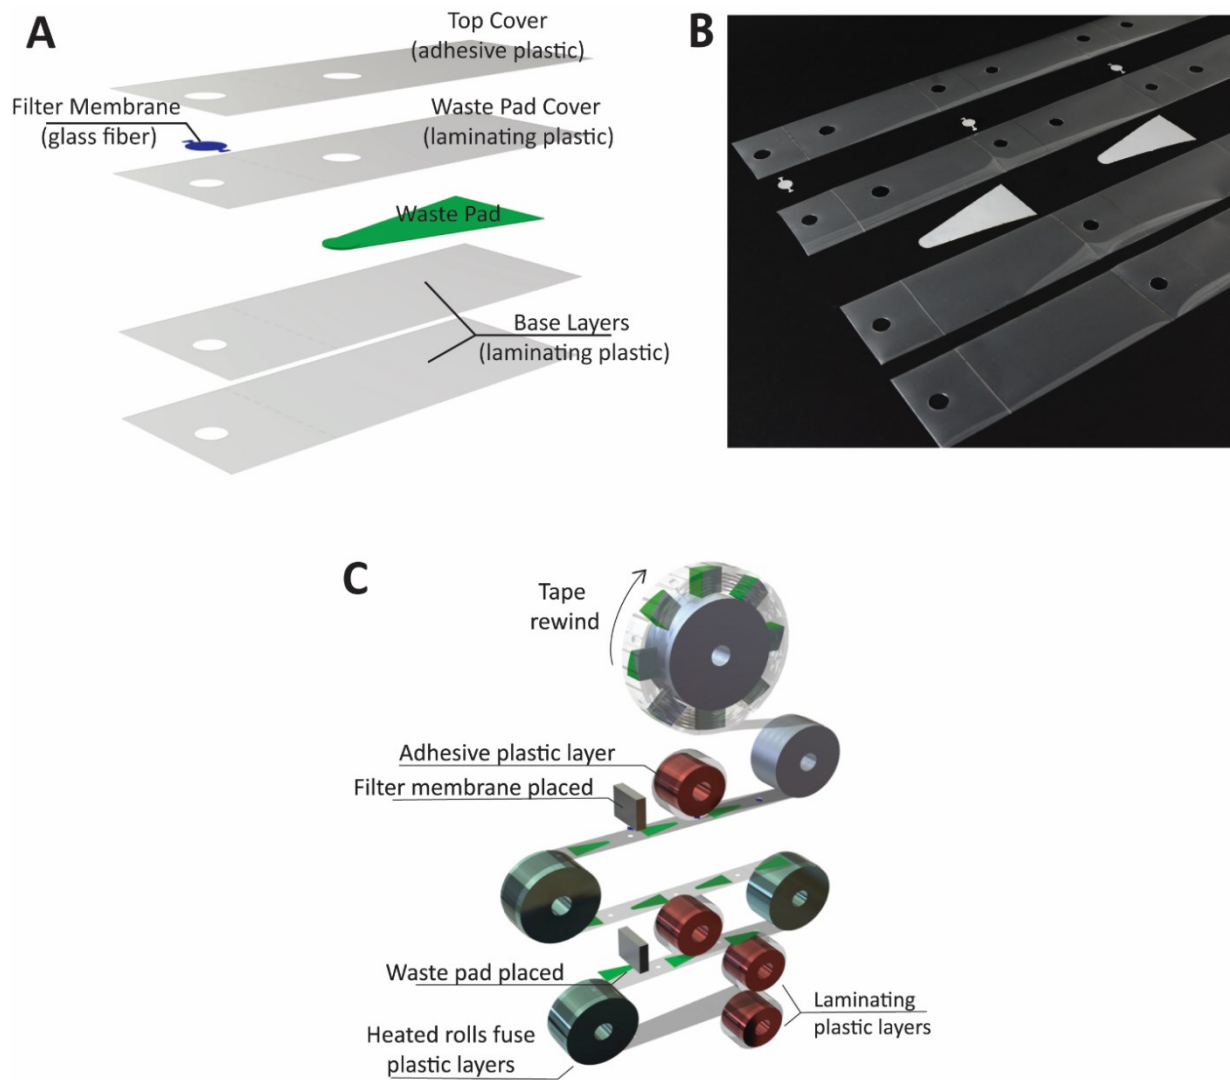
A) SNAPflex layers. (B) All components of the device can be manufactured in configurations suitable for roll-to-roll manufacturing. (C) Proposed roll-to-roll manufacturing schematic.
